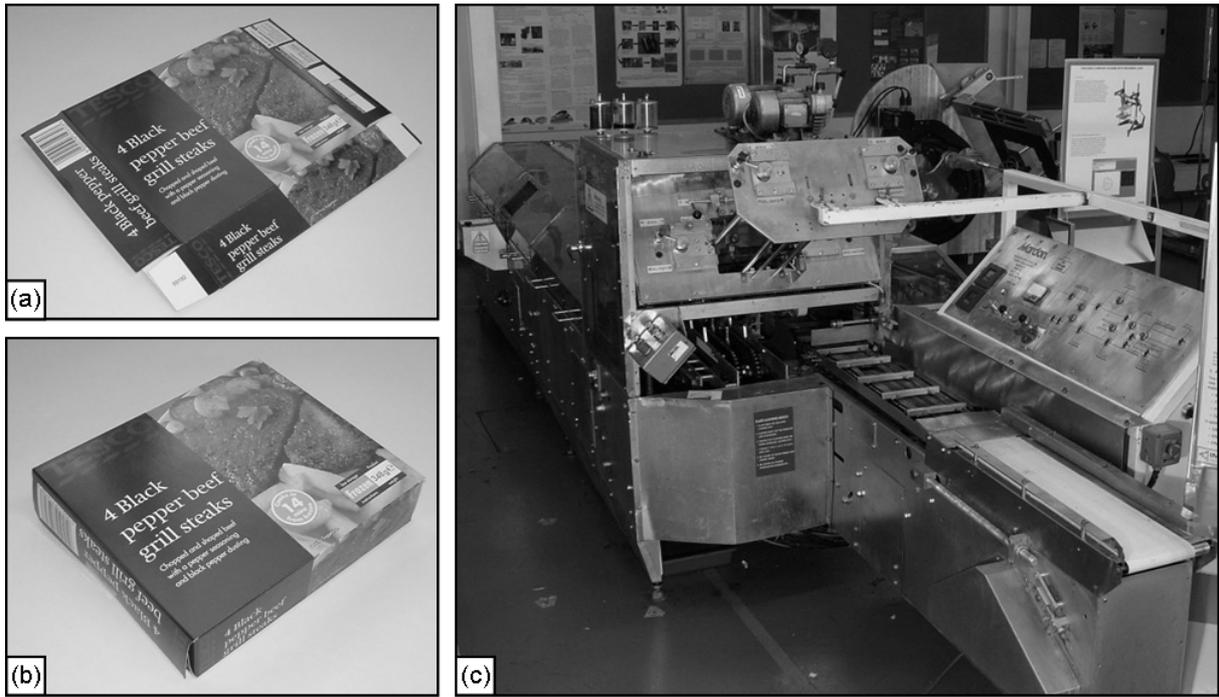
Skillets (a) are erected, filled and sealed to form shelf-ready cartons (b) by automated machinery (c) capable of processing over 250 packs per minute.
